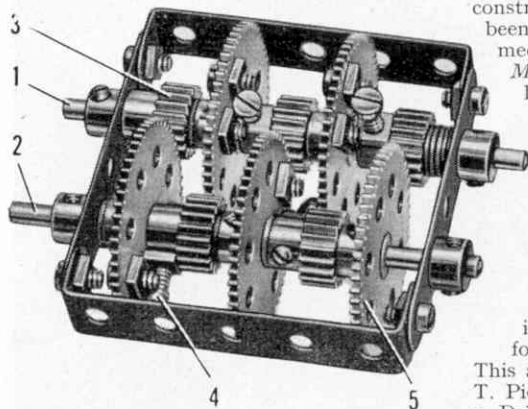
This compact gear arrangement provides a reduction ratio of 243 : 1 between the input and the output shafts of the mechanism.
